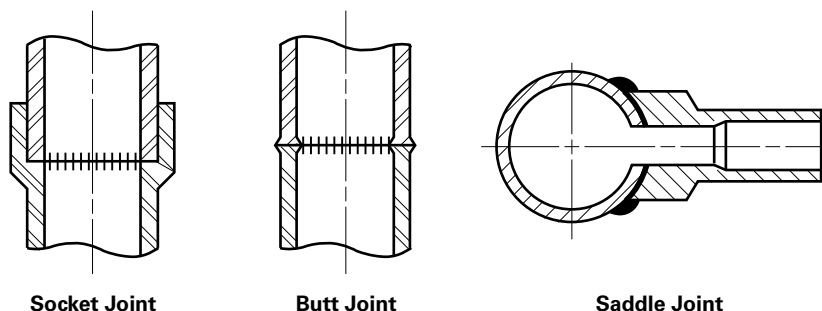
Thermoplastic Heat Fusion Joints
